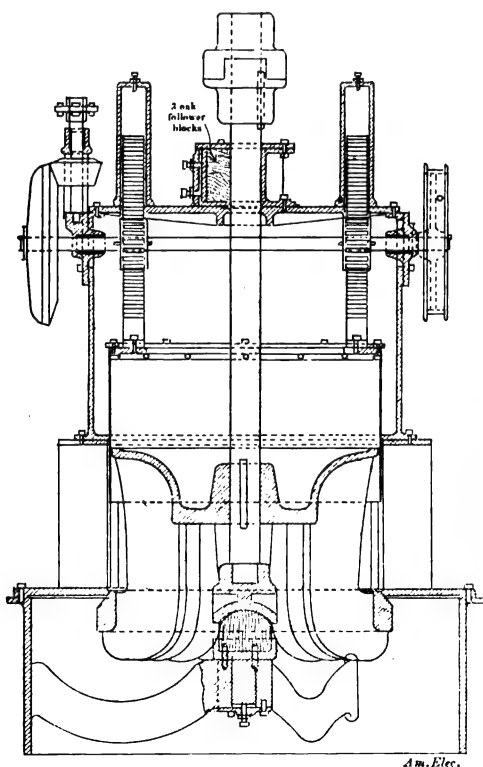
A.—SECTIONAL VIEW OF LITTLE GIANT TURBINE.
